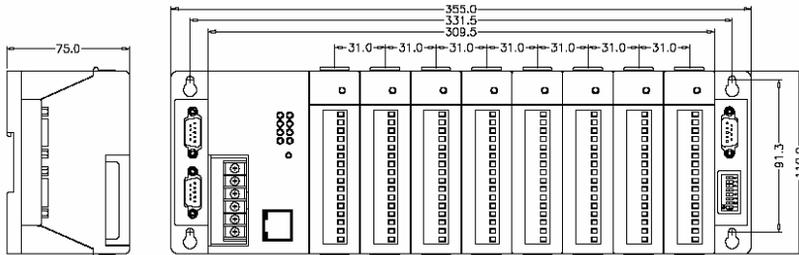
ADAM-5510EKW and ADAM-5510EKW/TP Dimension
